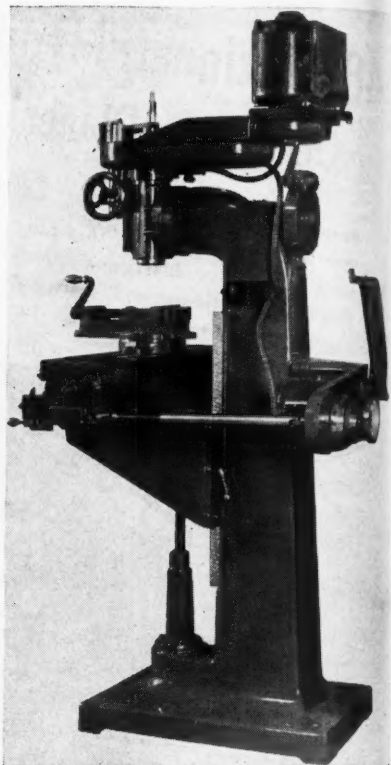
Blank & Buxton Improved Index High Speed Vertical Milling Machine
